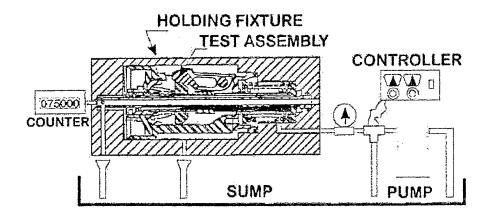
Low-Pitch-Stop Sleeve Testing Fixture Schematic
